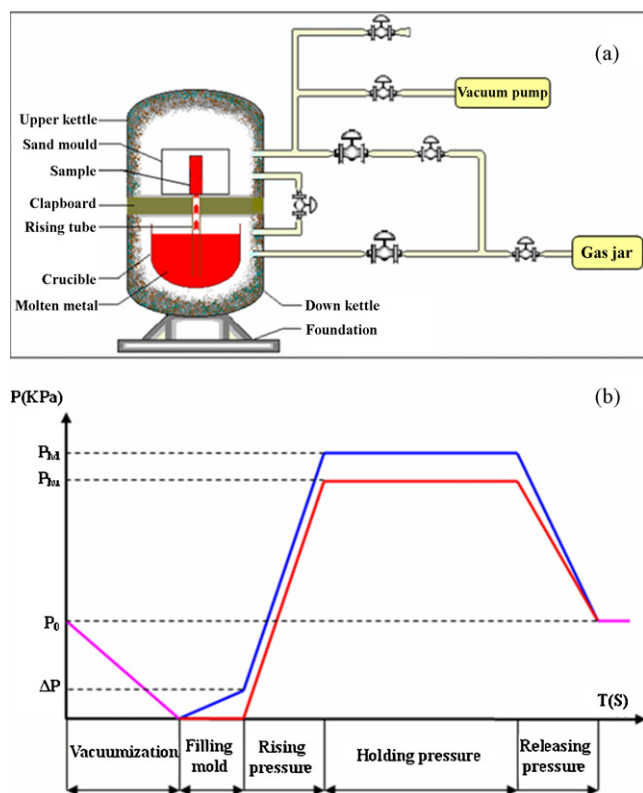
Equipment and technical graph of vacuum counter-pressure casting (a) equipment, (b) technical graph.
